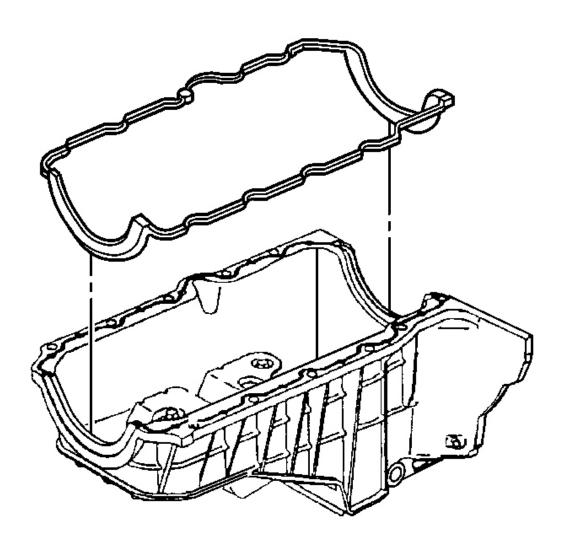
View Of Oil Pan Gasket Courtesy of GENERAL MOTORS CORP.
